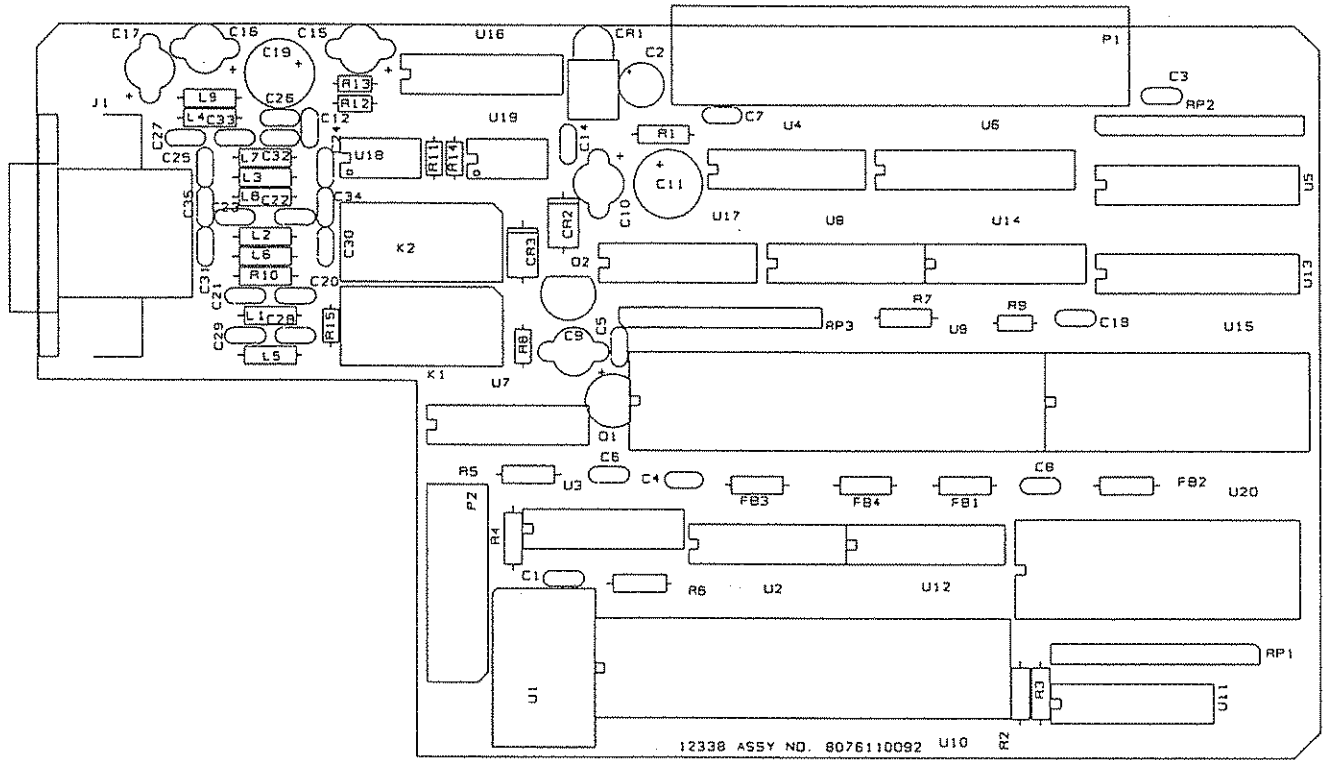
PC Assembly, I/O Board 3A2A3, page 2 of 4.
